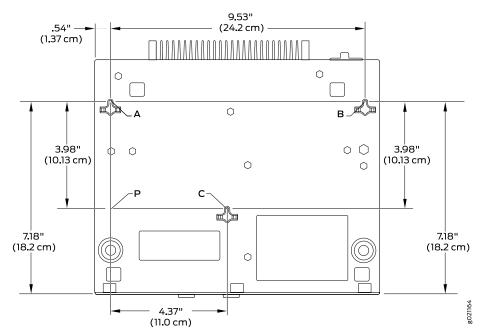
Measurements for Installing Mounting Screws for the EX2200-C Switch
